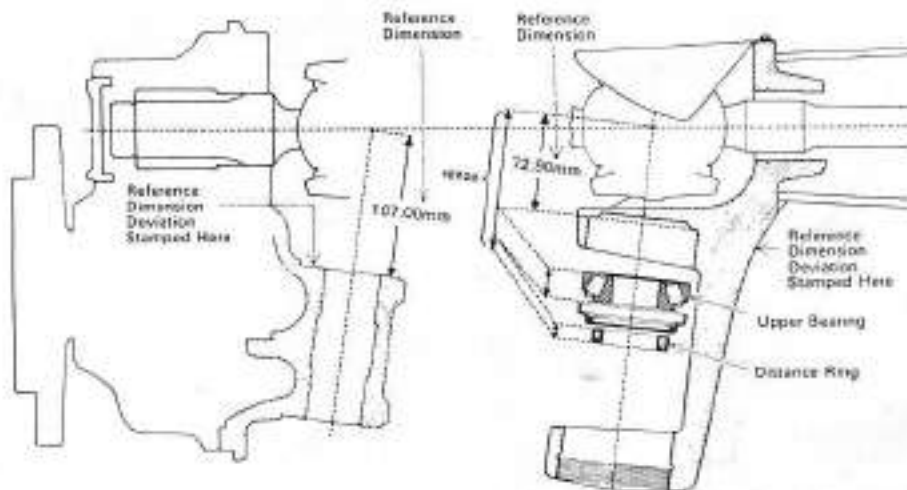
View showing location of the stamped reference deviations which appear on final drive carrier and axle housing. Refer to text for installation procedure.
